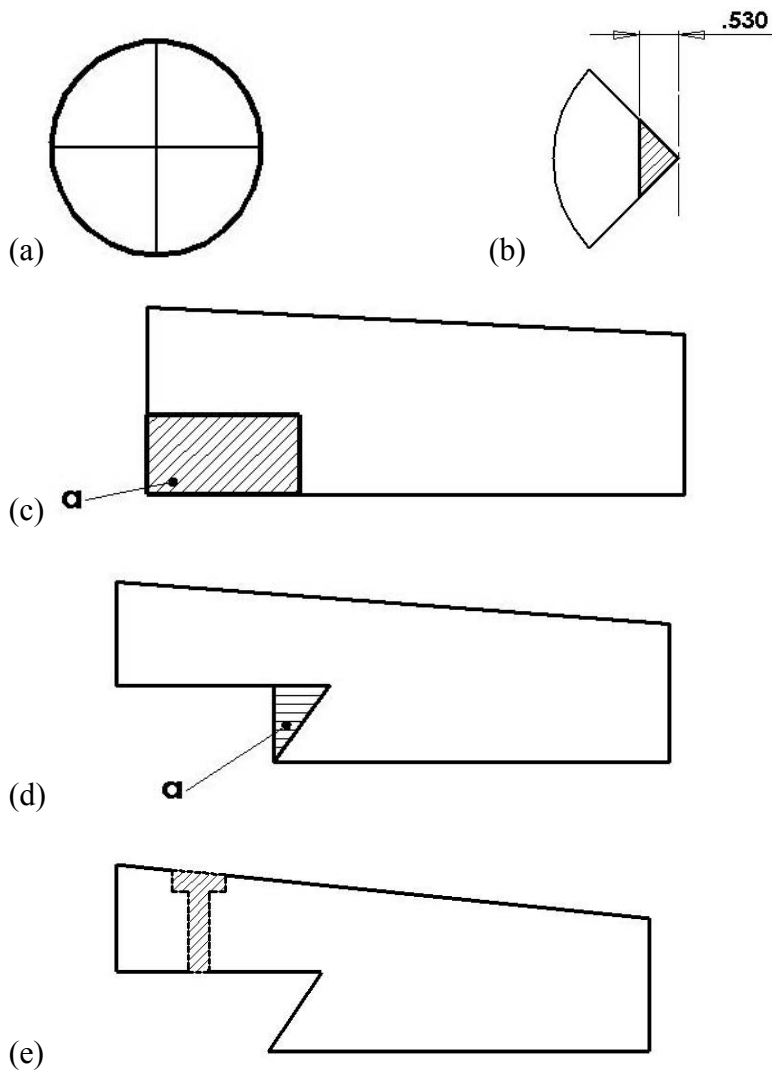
Machining steps to fabricate wedge. (a) step 2, (b) step 3, (c) step 10, (d) step 11, (e) step 12
